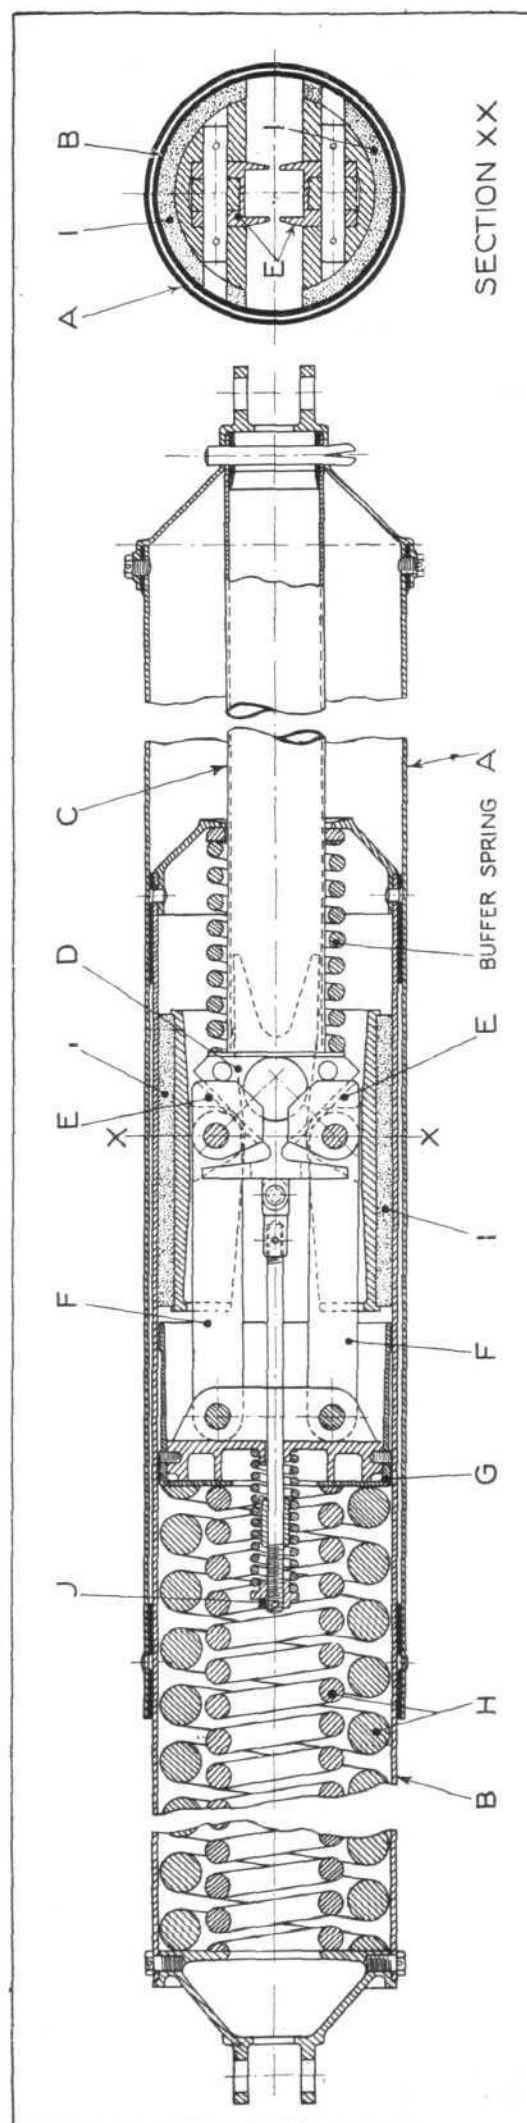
Sectional drawings of the Beardmore-Shackleton undercarriage "Leg," in which Ferodo friction blocks are used for damping. In the drawing A is the outer and B the inner telescopic tube. The loads are taken directly through tube C, wedge D, slippers E, connecting rods F, and piston G to the concentric coil springs H. The Ferodo-faced friction shoes I are forced against the walls of tube B by the wedge D.
